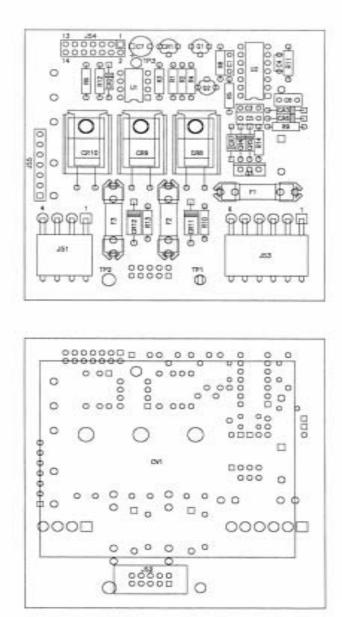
Line Battery Board (Top and Bottom) 0670-00-0626 0670-00-0656
